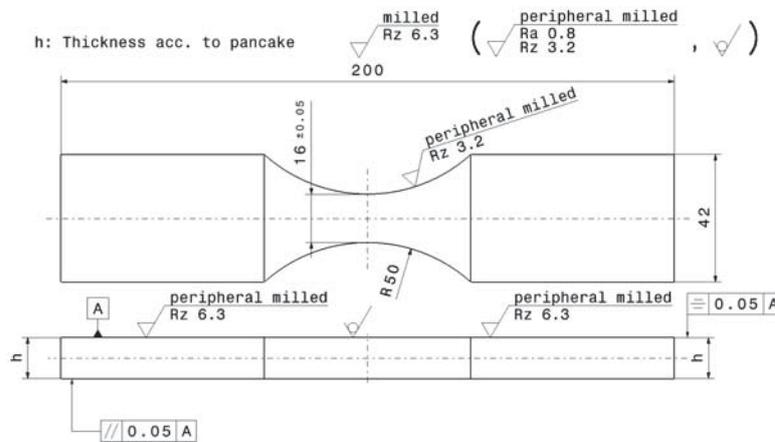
Plane four-point-bending test specimen with as-forged gauge
